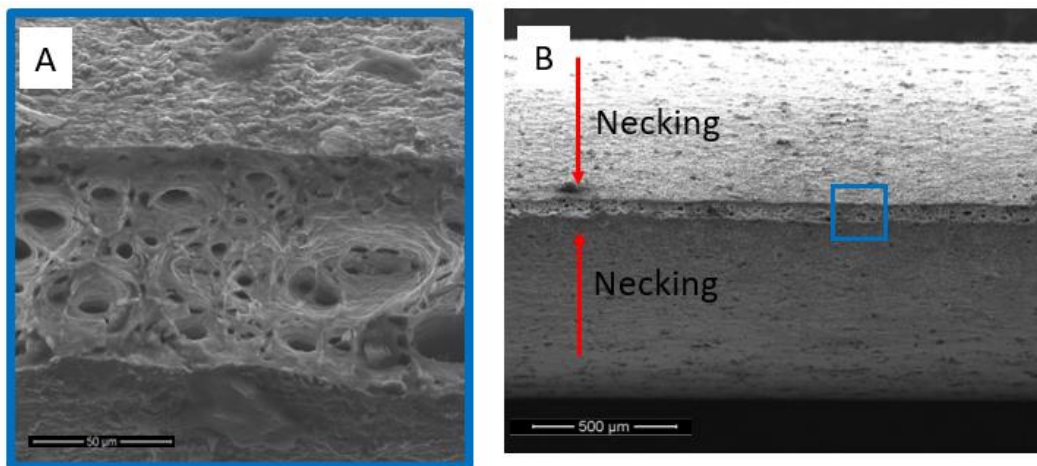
(A) Detailed fracture surface of QP1180 bare steel hot tensile tested at 800°C (B) Overall fracture surface
